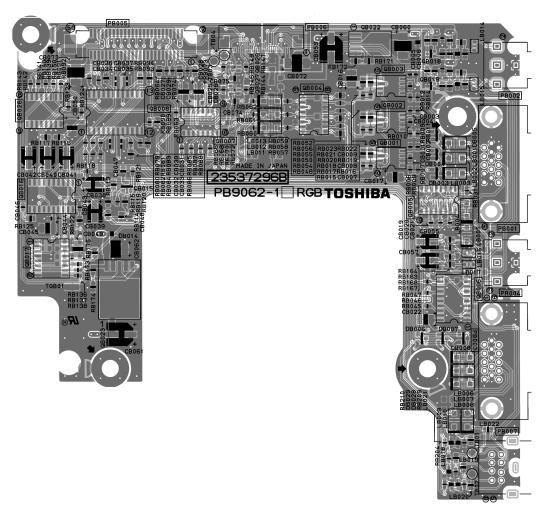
U0021 RGB PC Board (Top Side)
